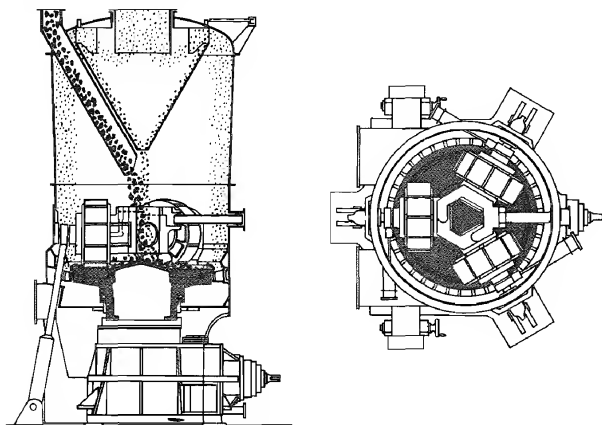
Atox roller mill for coal grinding (F. L. Smidth)
